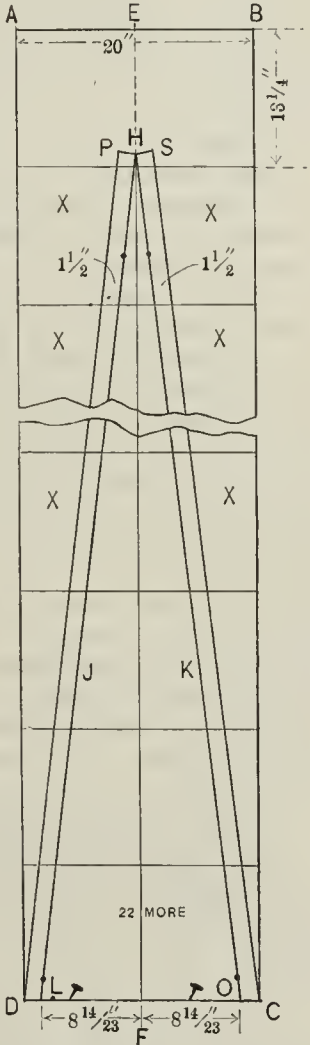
Obtaining Patterns for Standing Seam Strip
